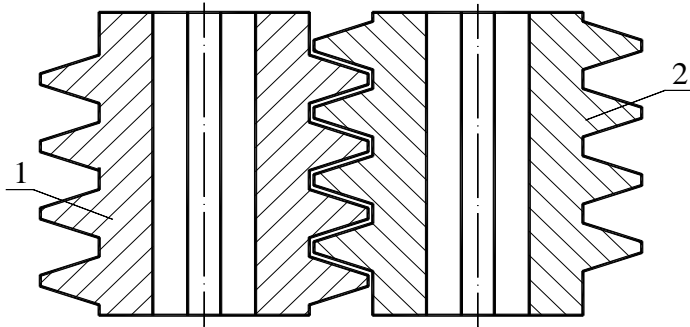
Rolling processing unit with toothed rollers: 1, 2 – toothed rolls [23]
